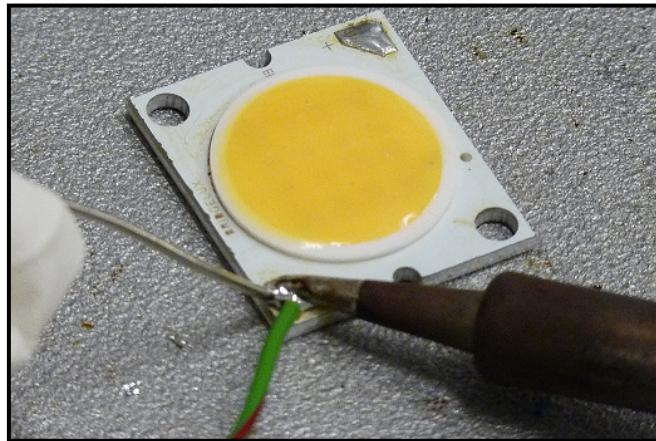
Soldering a pre-tinned wire to a pre-tinned solder pad
